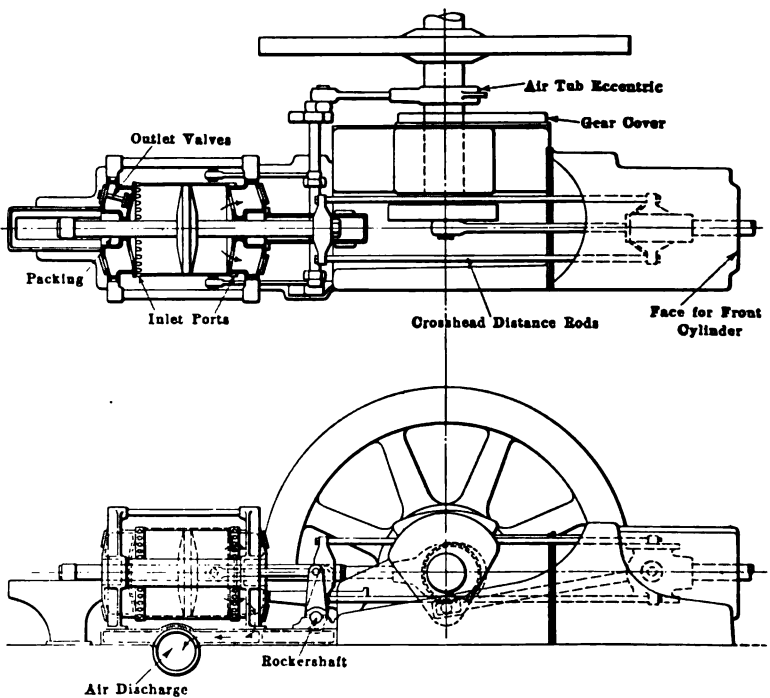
"Stick" blowing tub. Westinghouse Machine Co.
